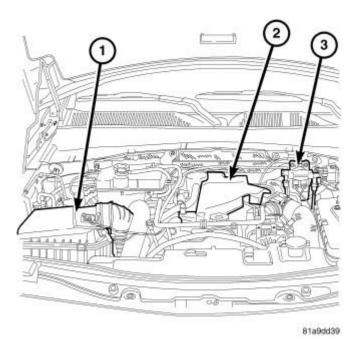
ENGINE COVER Courtesy of CHRYSLER LLC
